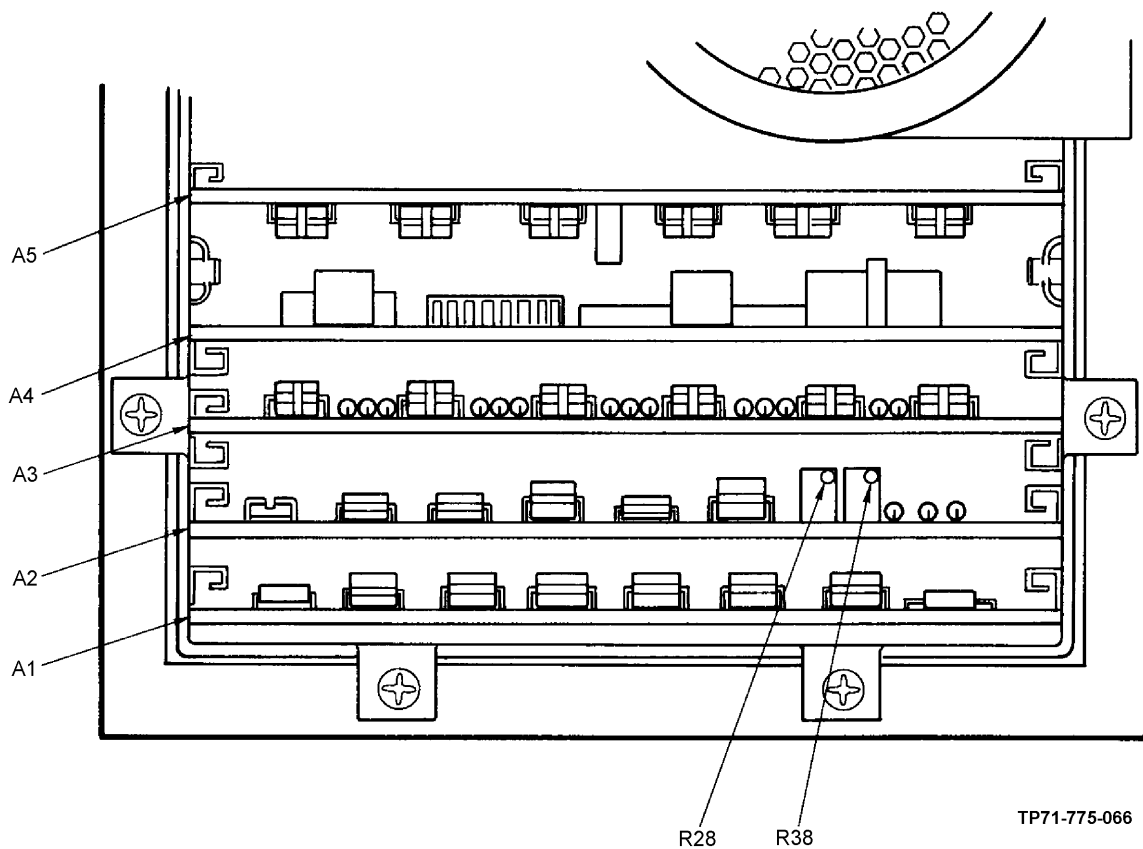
IVD Electronics Assembly CEM CCA Adjustment Locations
